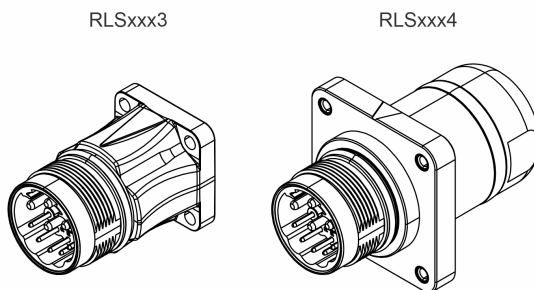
RLSxxx3 and RLSxxx4 flange connectors
